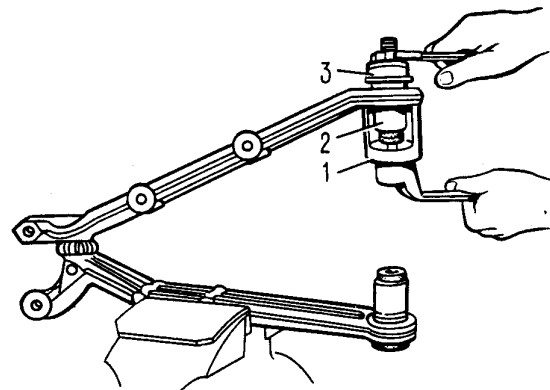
Press-Fitting Lower Wishbone Silent Blocks:
